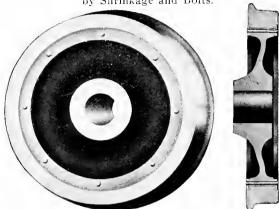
Cast Steel Plate Center with Tire Held by Shrinkage, Double Lip Retaining Rings and Rivets.
